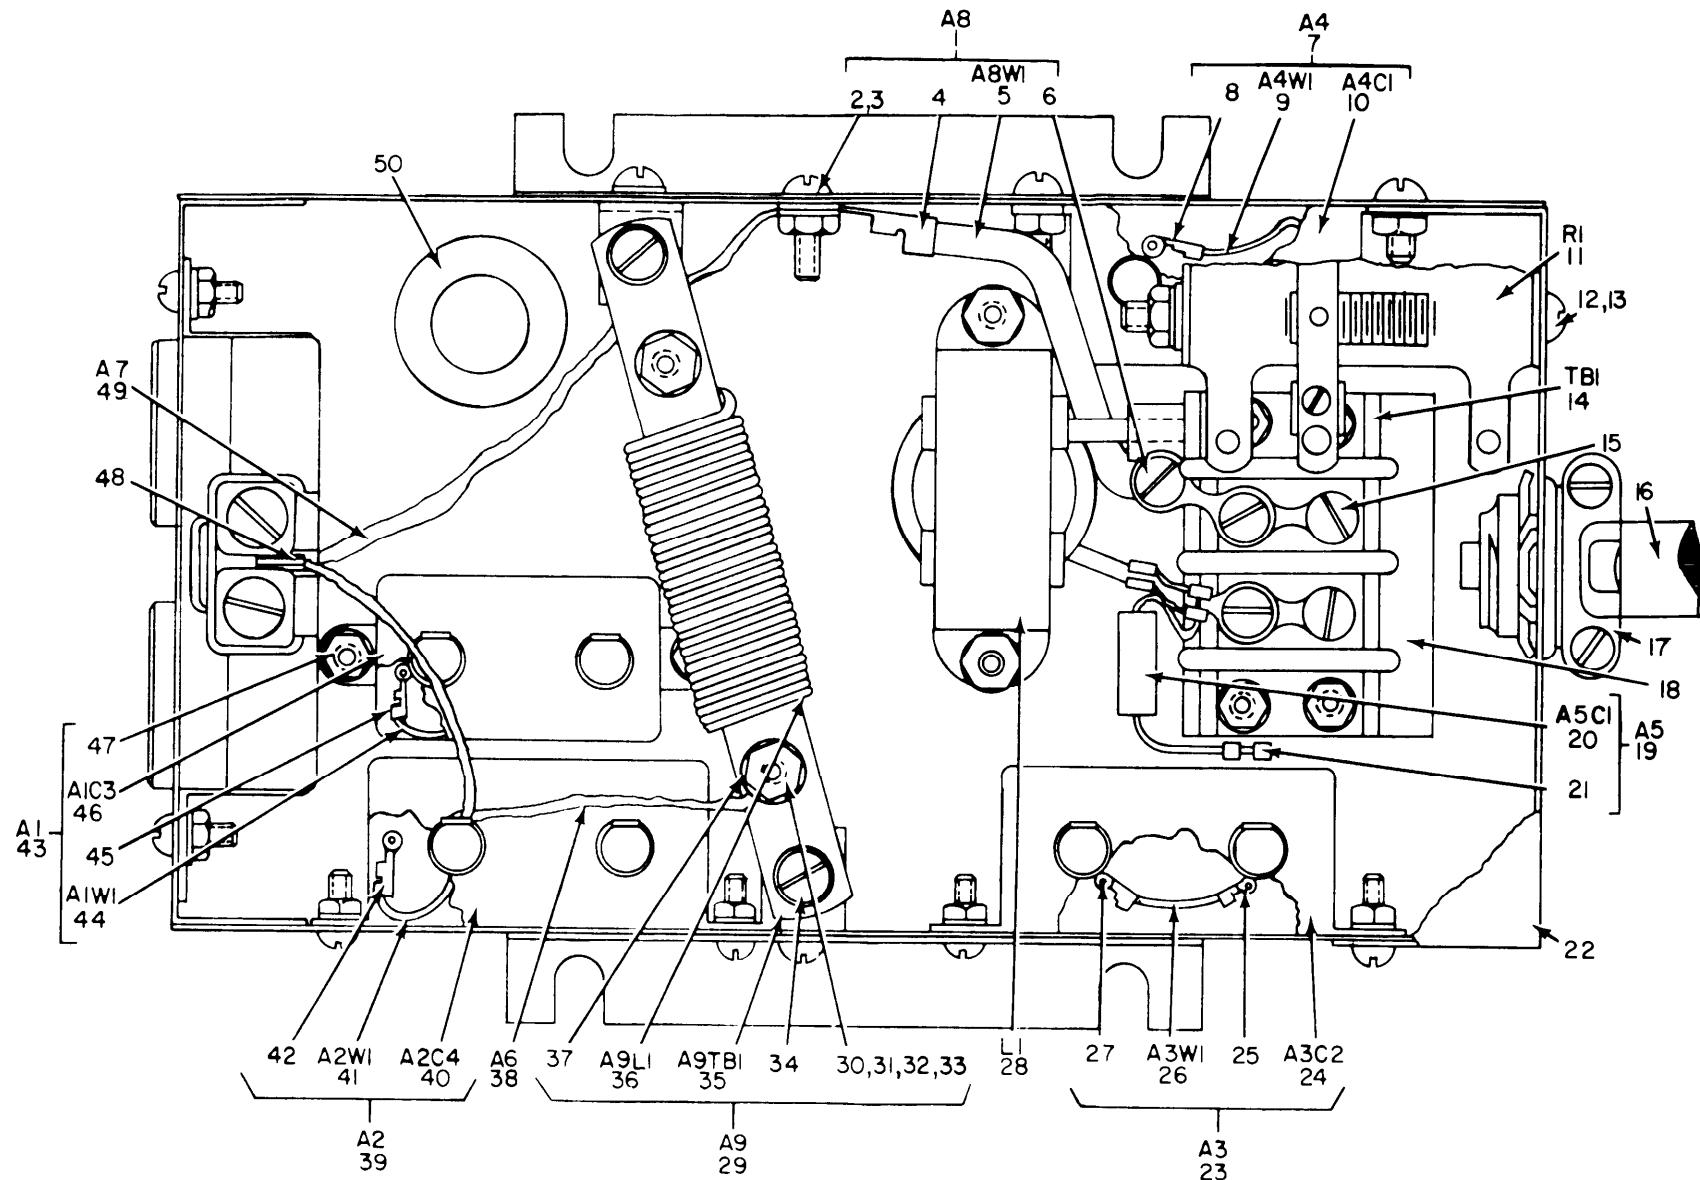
Motor Generator PU-724/G (Northfield Electric), Exploded View (Sheet 2 of 2).
